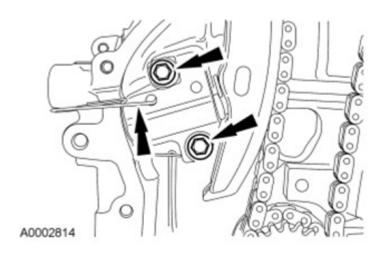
Locating Timing Chain Tensioner And Bolts Courtesy of FORD MOTOR CO.
